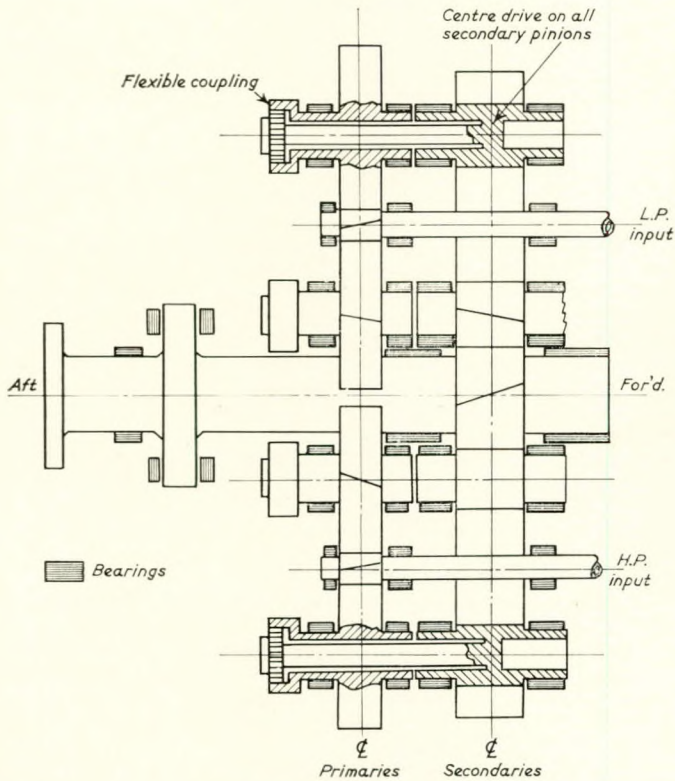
Y.E.A.D.1 gears—Arrangement of gears
